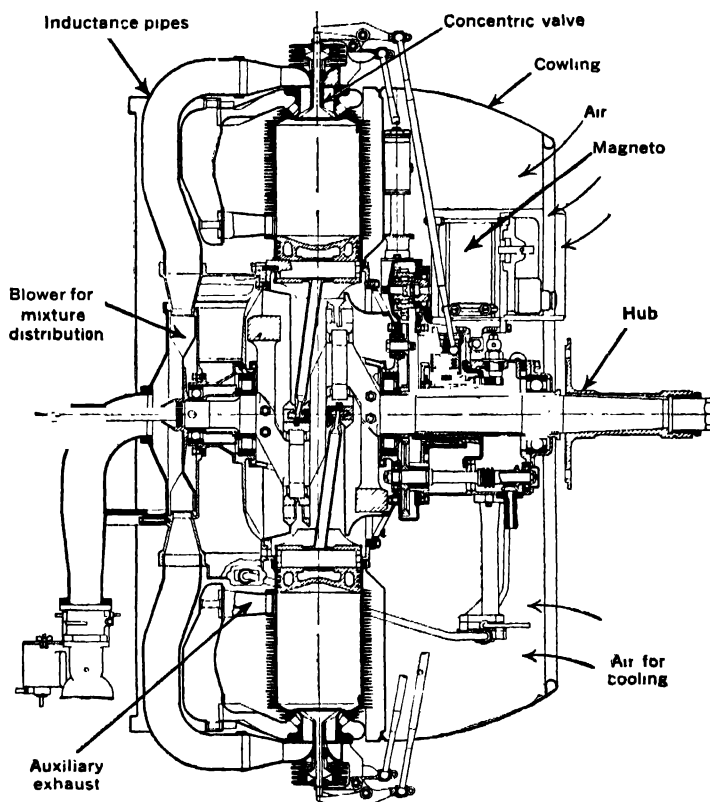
An Experimental 300 Horsepower Ten-Cylinder Smith Static Radial Engine Designed Some Years Ago Had Rotary Mixture Distributor and Very Effective Cowling Built Into the Engine.
